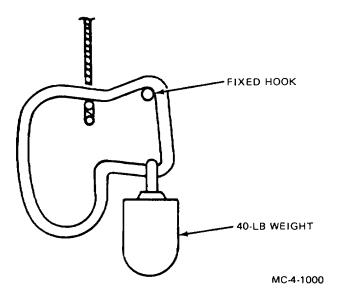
Performing a Ripcord Grip Weld Test.
